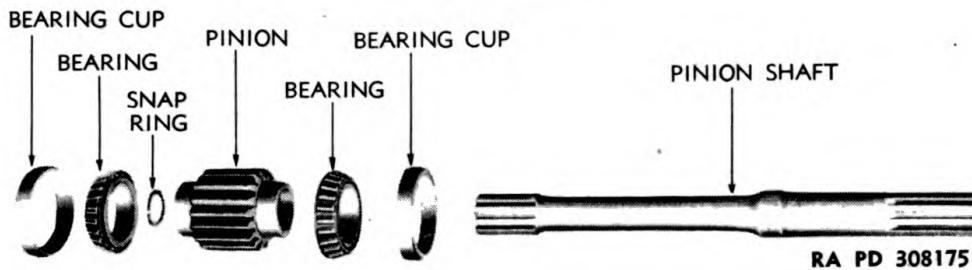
Final Drive Pinion Shaft and Bearings Disassembled
